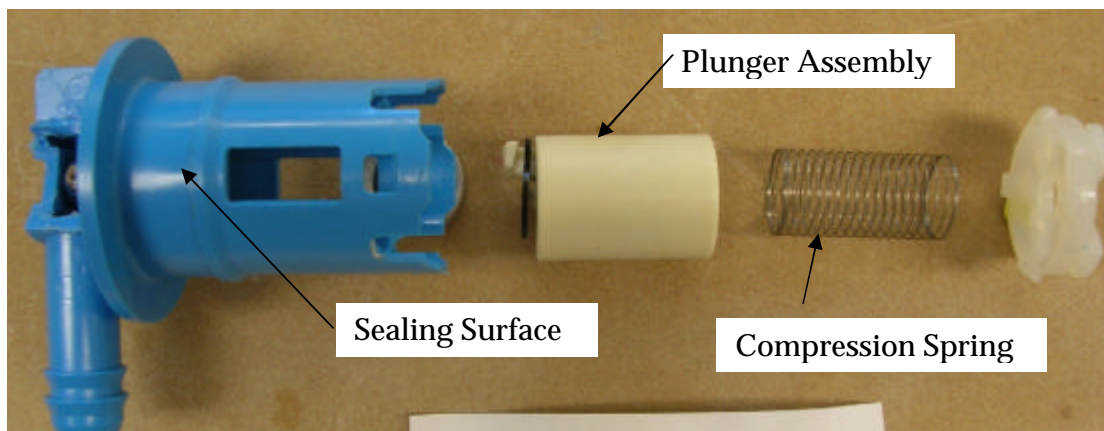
Ford Mustang second fuel vapour valve - disassembled.
